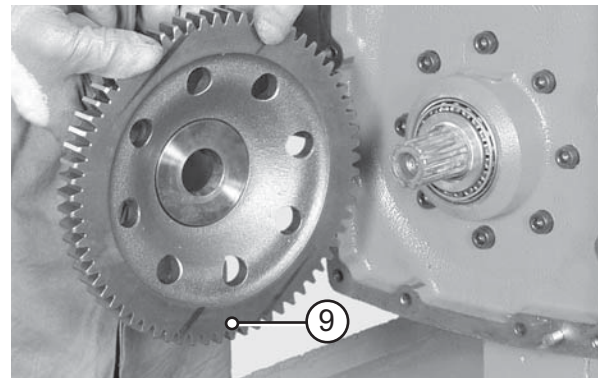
Remove the flange and secondary gear wheel (9) using two levers.
